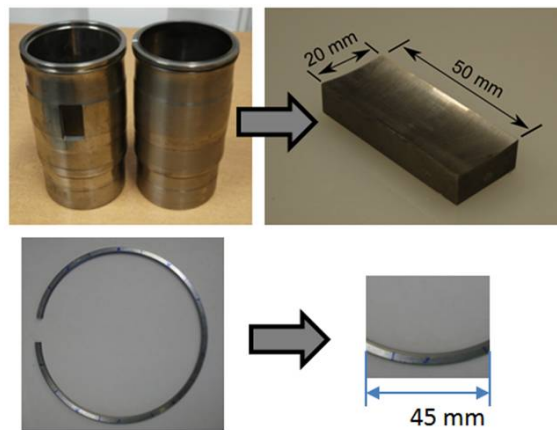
Photos illustrating the dimensions of ring and liner sections machined out from the original heavy duty engine components.
